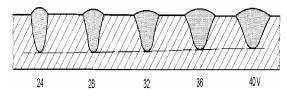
Change in arc voltage affects the shape of weld, welding current is constant [5].
